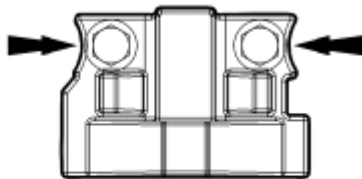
Identifying Cylinder Head Remover/Installer (303-572)
